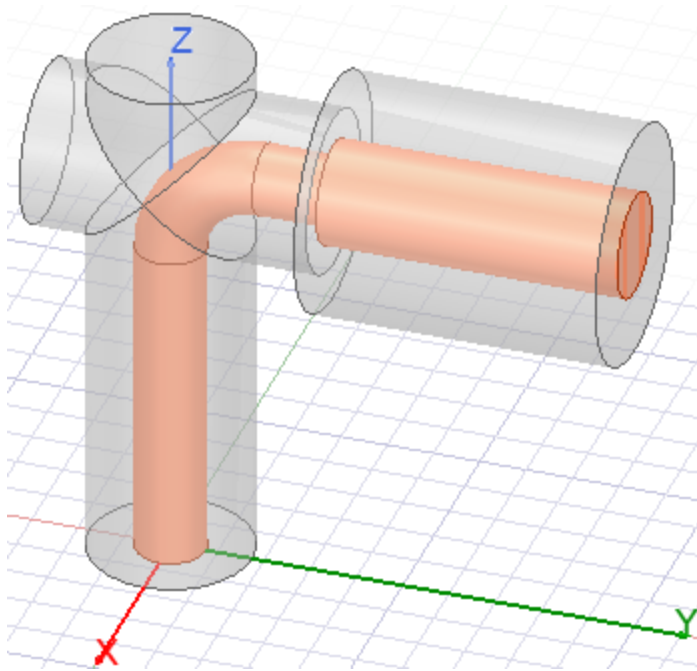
Intersection Appearance after Cylindrical Parts are United
